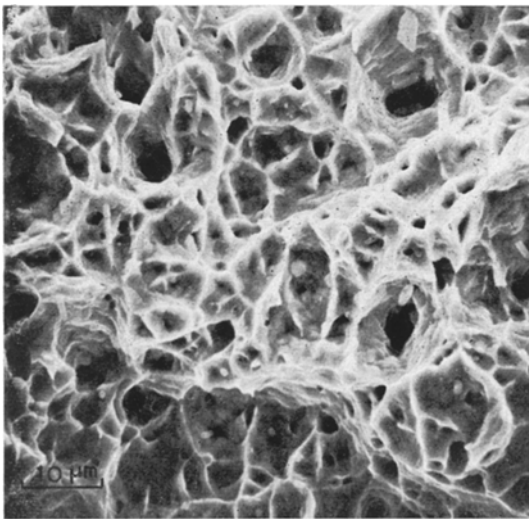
A transverse fracture showing precipitates and fracture channels perpendicular to the fracture face.
